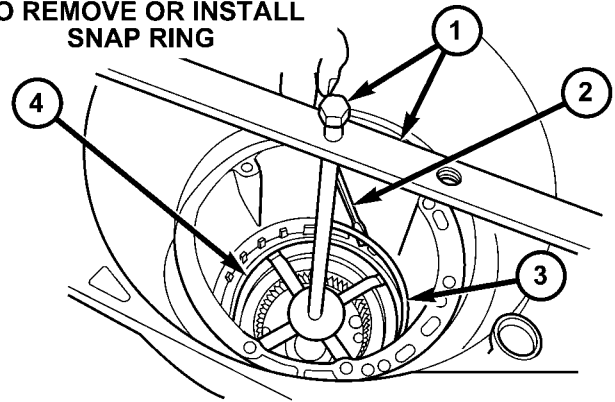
Remove 2/4 Clutch Retainer Snap Ring
